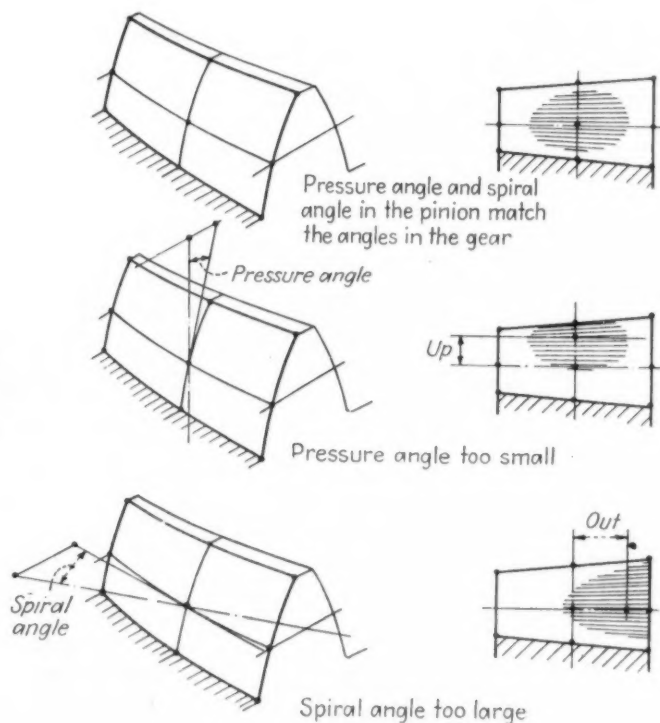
The position of tooth bearing in spiral bevel gears is affected by changes in pressure angle or spiral angle.
